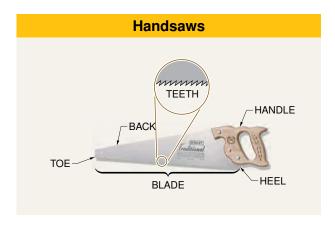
The main parts of a handsaw are the blade (including the toe and heel of the blade), teeth, back, and handle.
